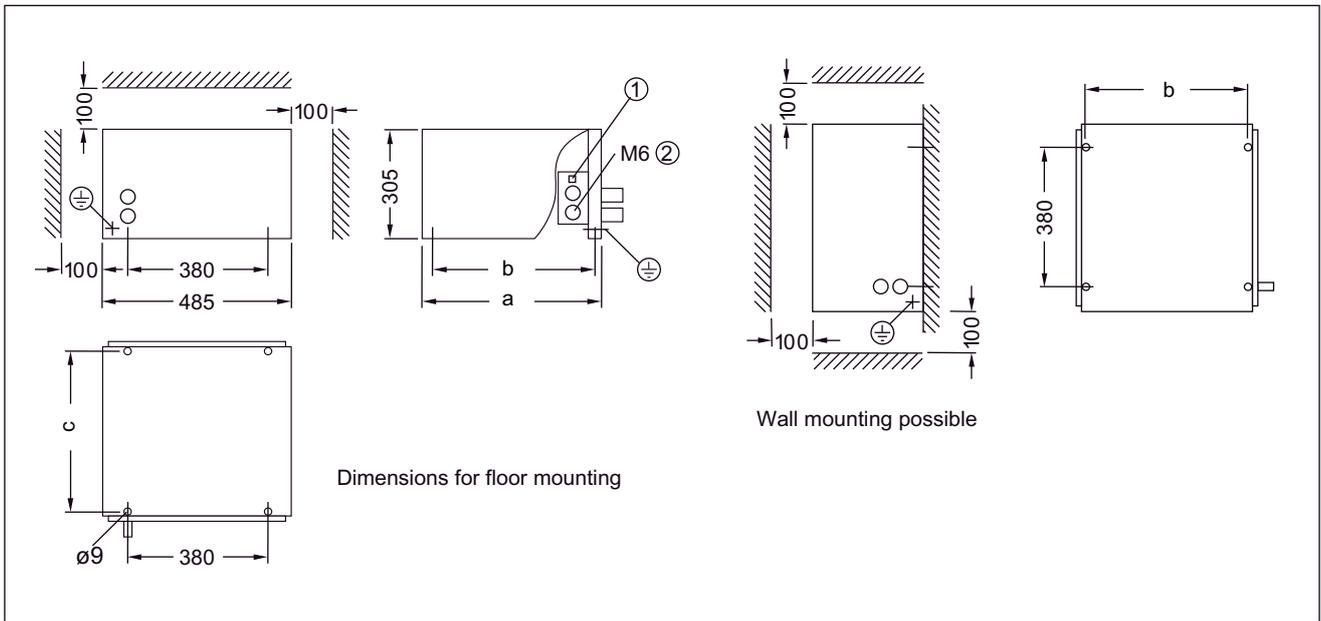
Dimension drawing: Braking resistor 30 kW and 75 kW
